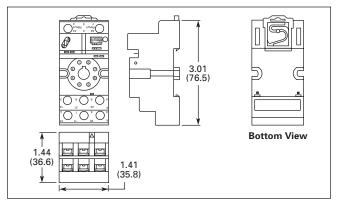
D3PA6 — Approximate Dimensions in Inches (mm)
